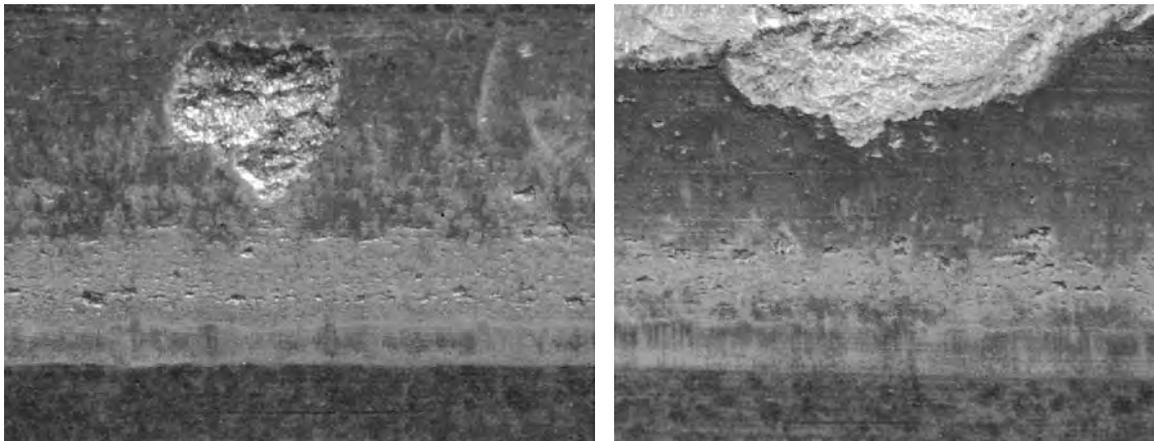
Crush of intruding wear debris to initiate spalling-off of tooth flank
